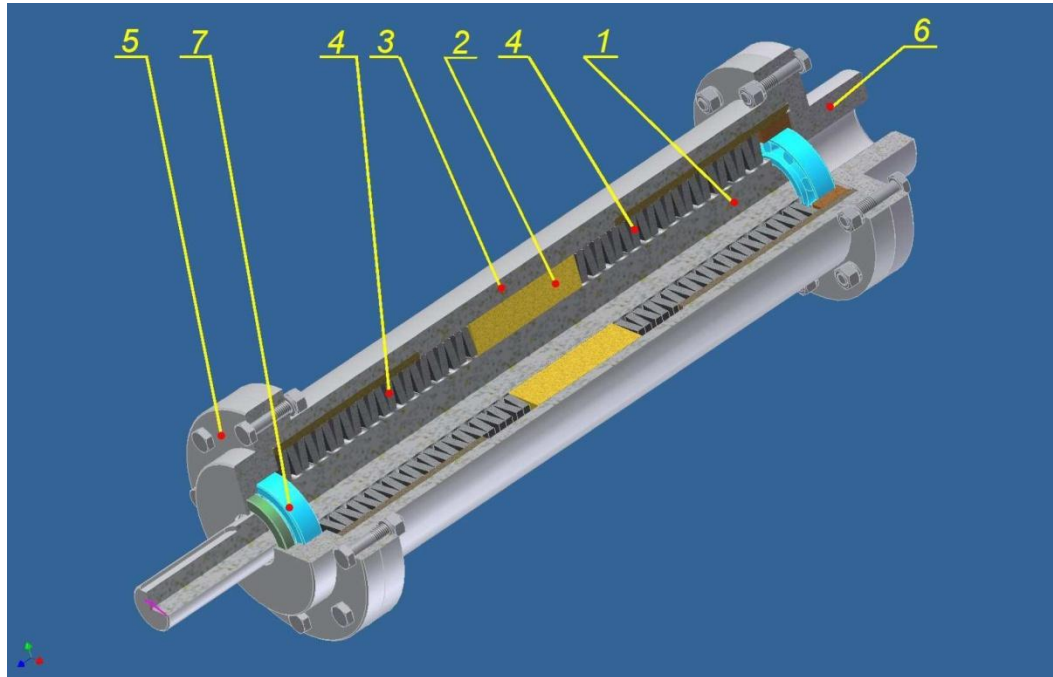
Two-way- flexible torsional metal coupling prototype construction. 1 – Screw-threaded coupling shaft, 2 – Splined sliding sleeve with internal screw thread, 3 – Housing with cut splines, 4 – Disk spring set, 5 – Cover plate, 6 – Coupling hub, 7 – Cone bearings
